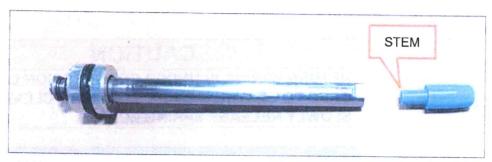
PISTON ROD, INSTALLATION TOOL AND CUTAWAY END GLAND
